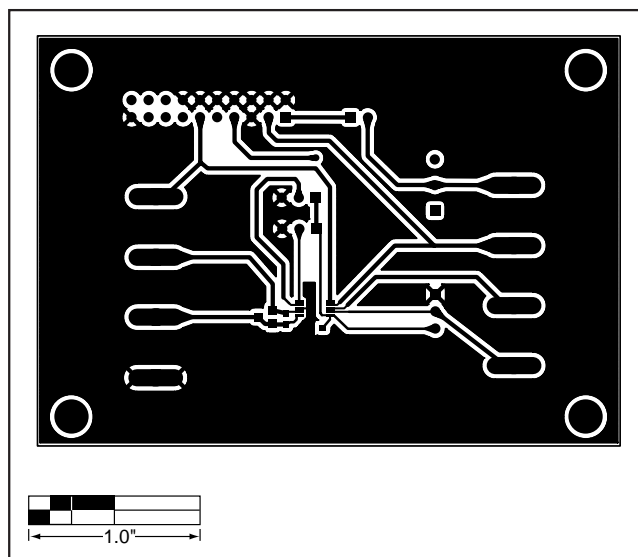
MAX1618 EV Kit PC Board Layout—Component Side
